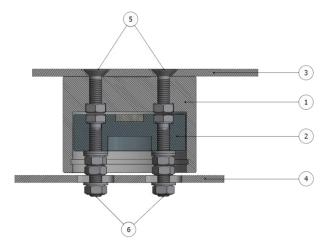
SCHEMATIC DRAWING OF WHEEL ANGLE SENSOR WHEN MOUNTED
